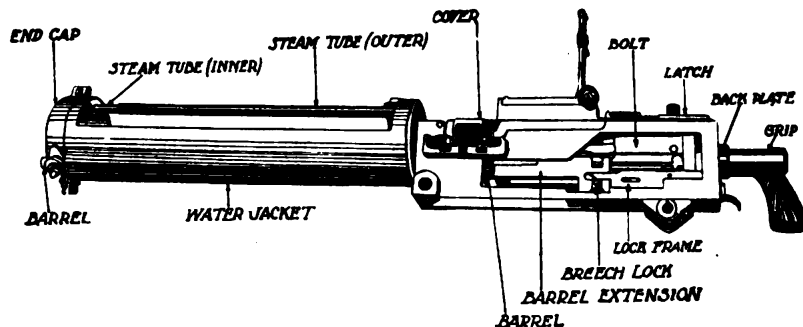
Browning caliber .30 machine gun, M1917.
